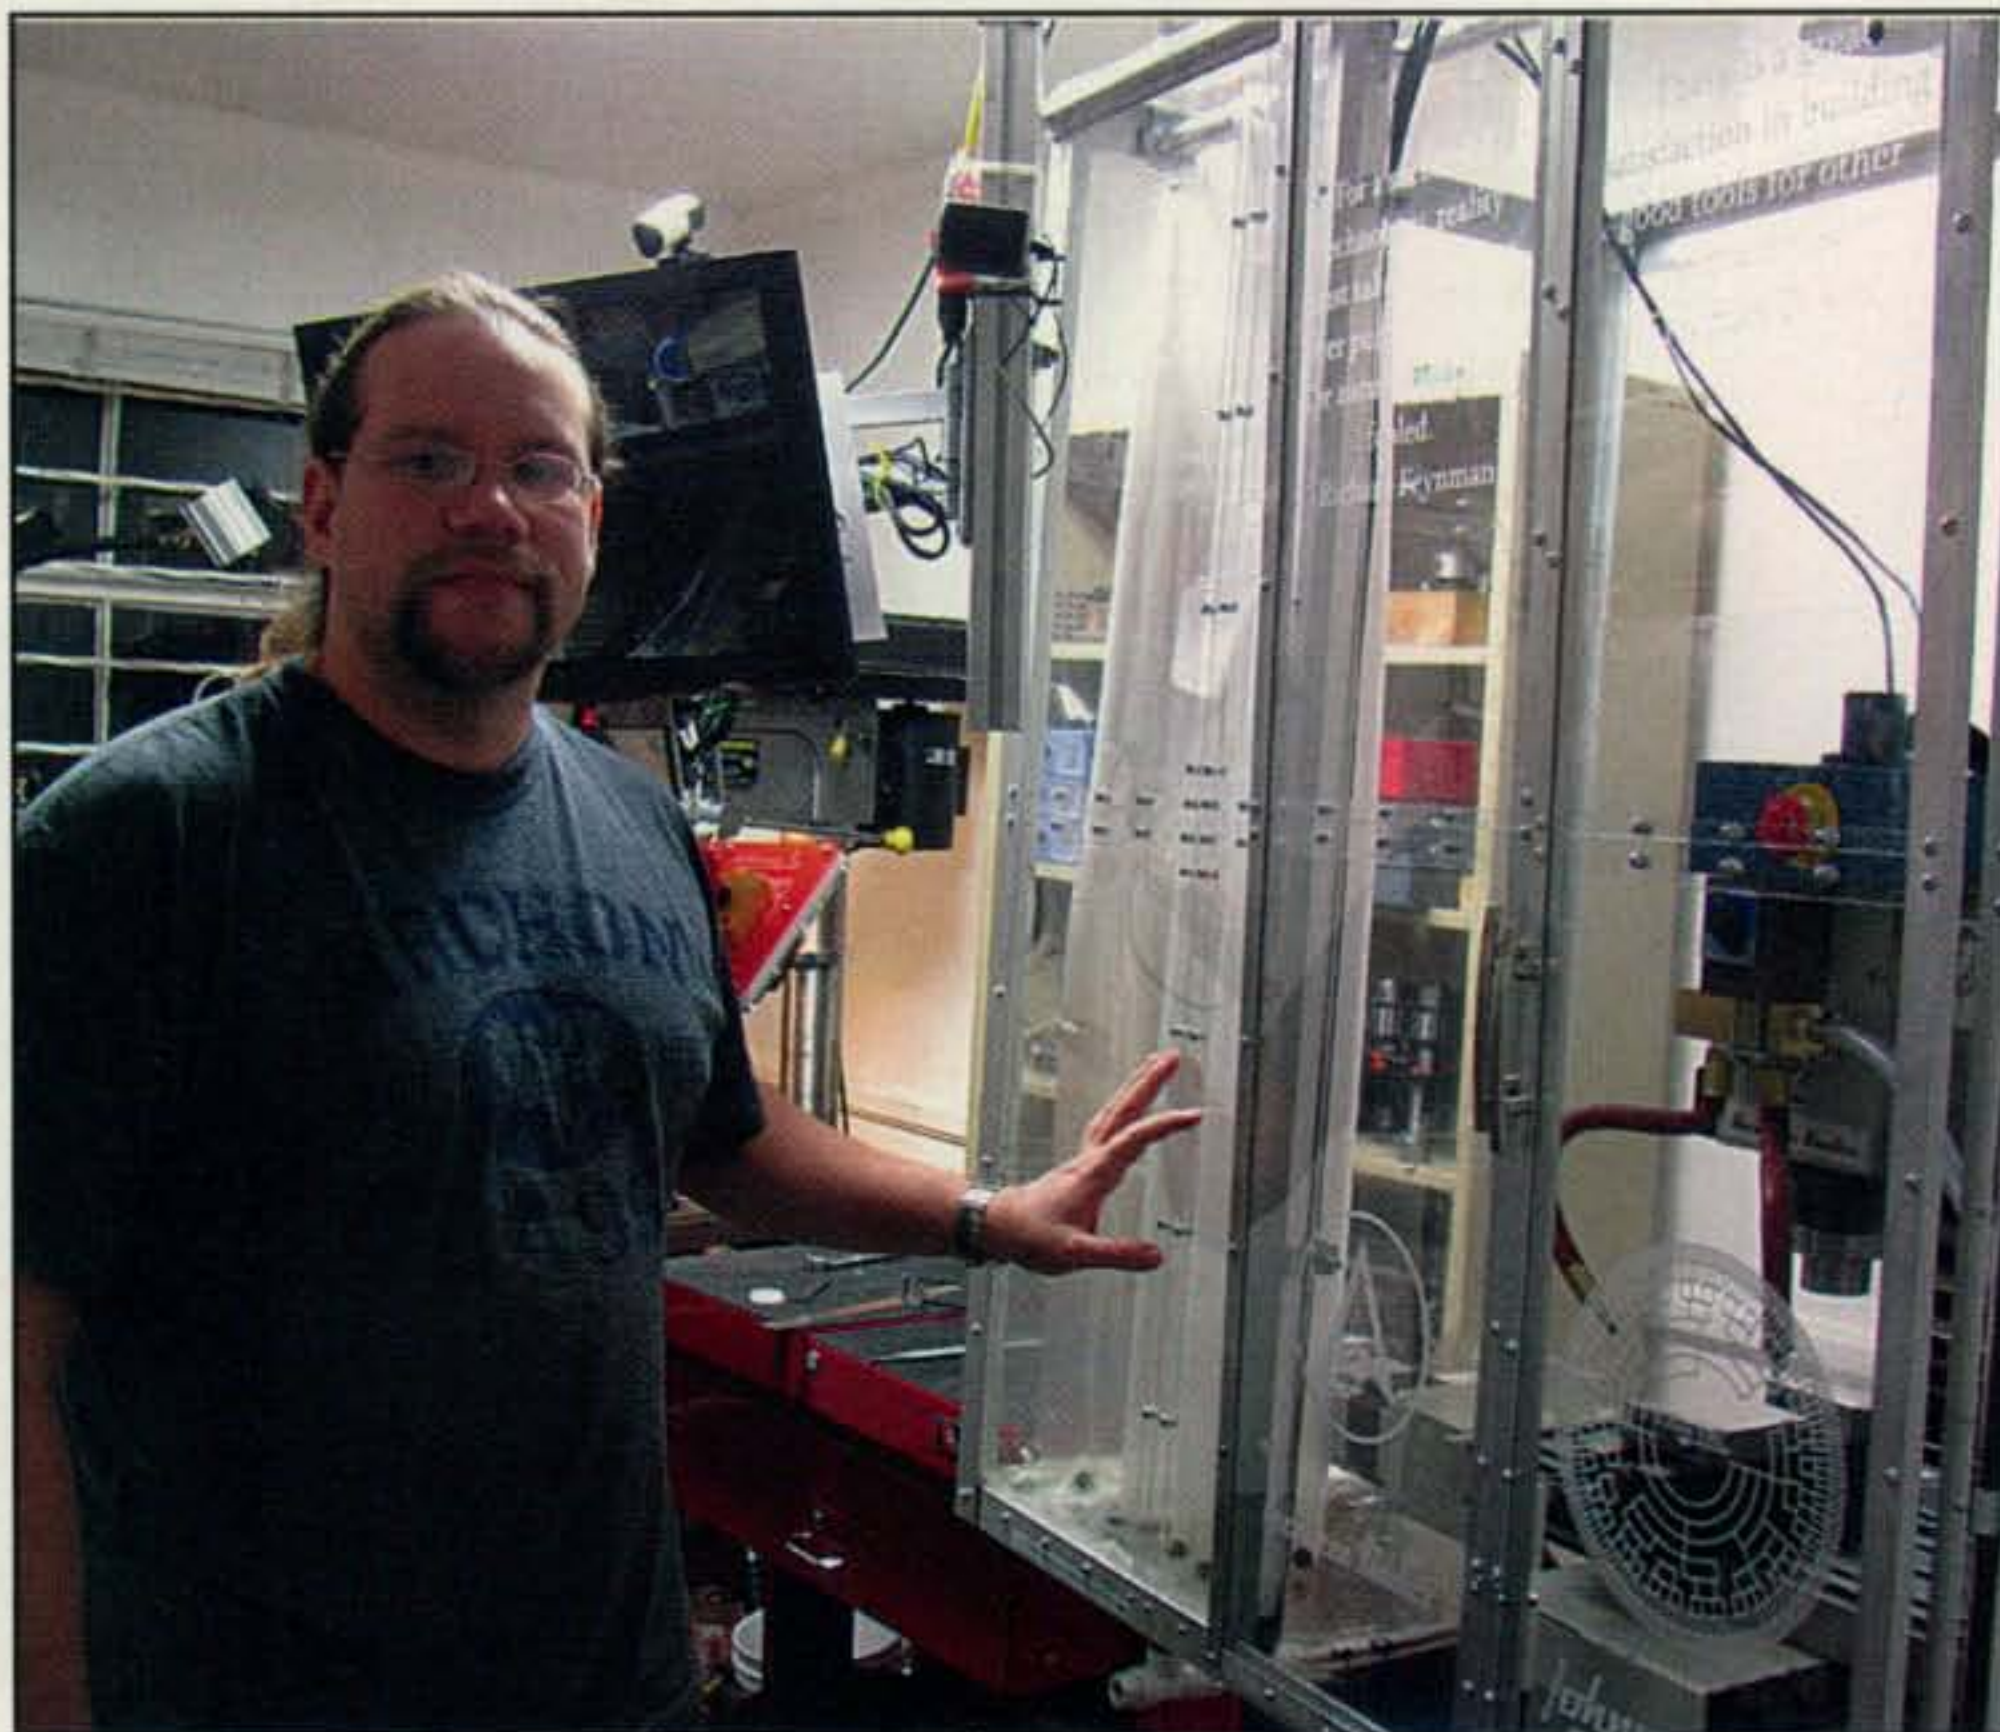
Justin Corwin in front of Johnny 5, the rebuilt and modified CNC milling machine at Crash Space.
